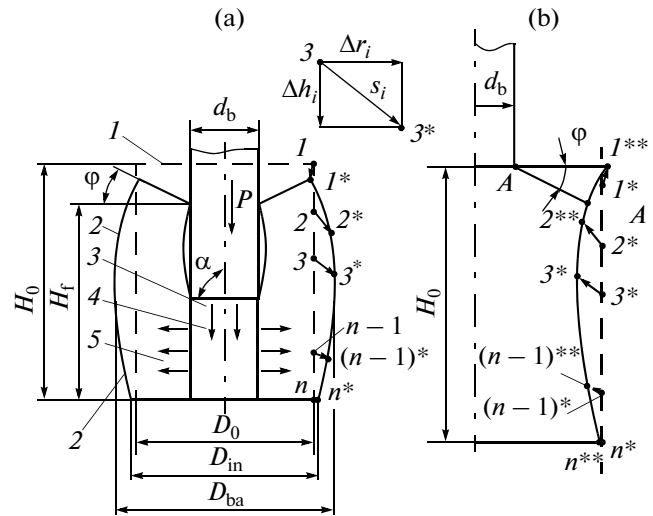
Analysis of the shaping of a cylindrical workpiece in open broaching (a) and design of the generatrix of a complex workpiece (b).
